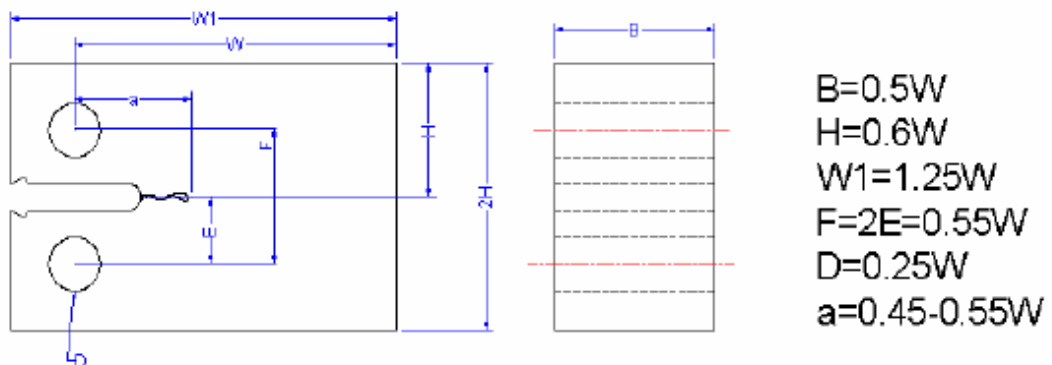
Compact Tensile Specimen fracture toughness test geometry.
